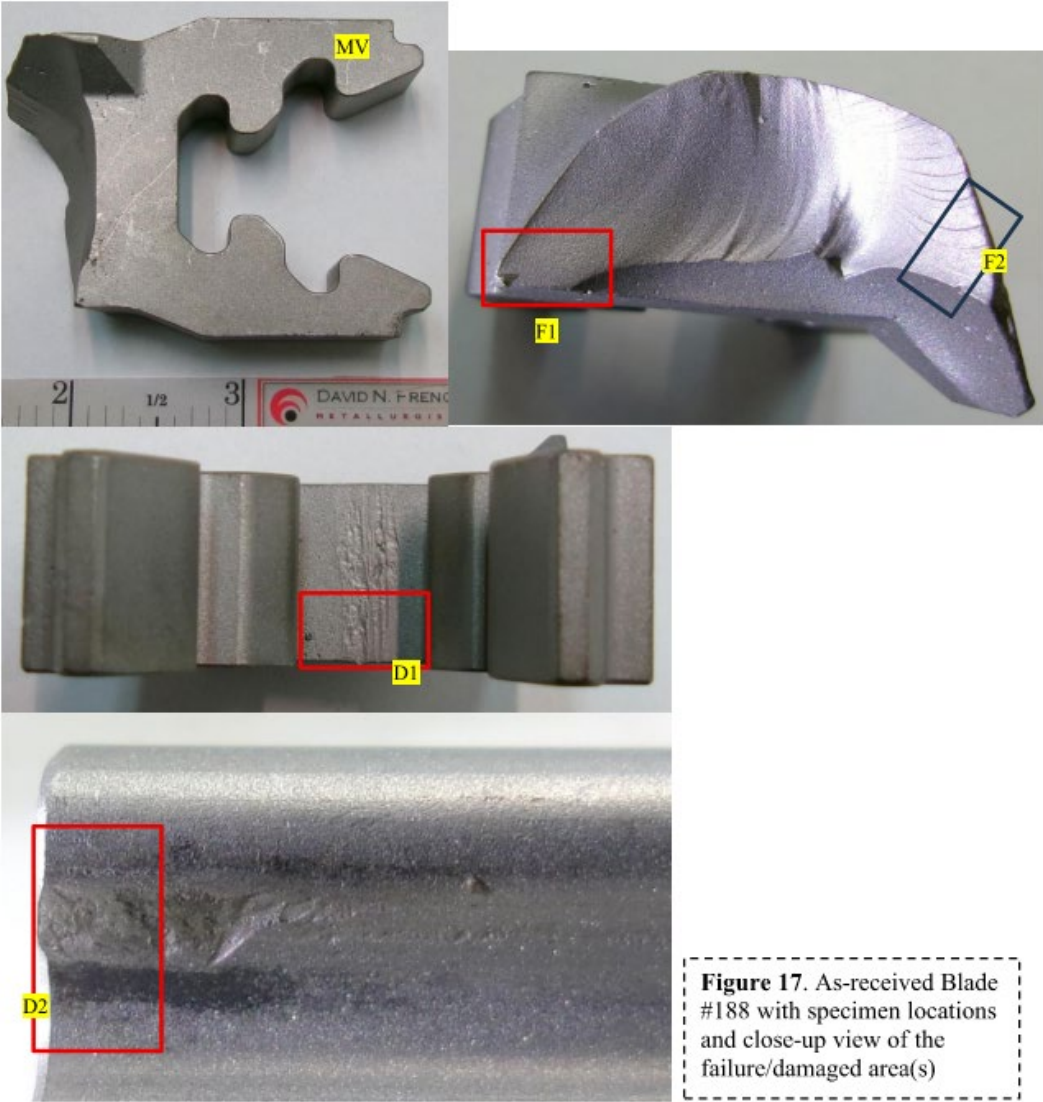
As-received Blade #188 with specimen locations and close-up view of the failure/damaged area(s)
